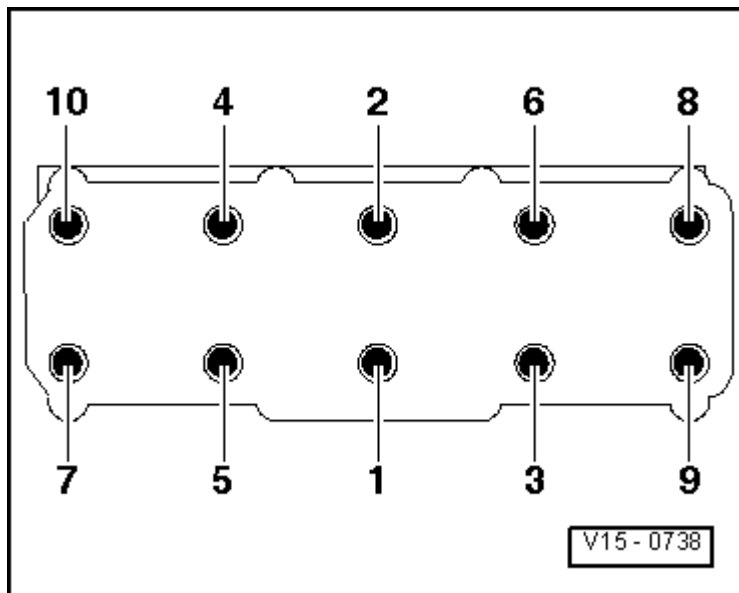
Identifying Cylinder Head Bolt Tightening Sequence
